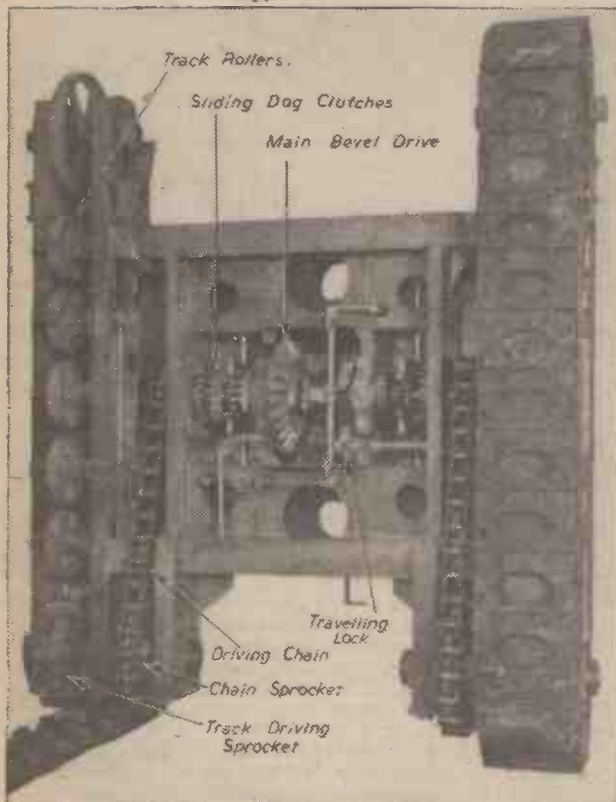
Underneath view of excavator chassis, with one track removed, showing rollers and sprockets. Bottom plate under gears has also been removed.
